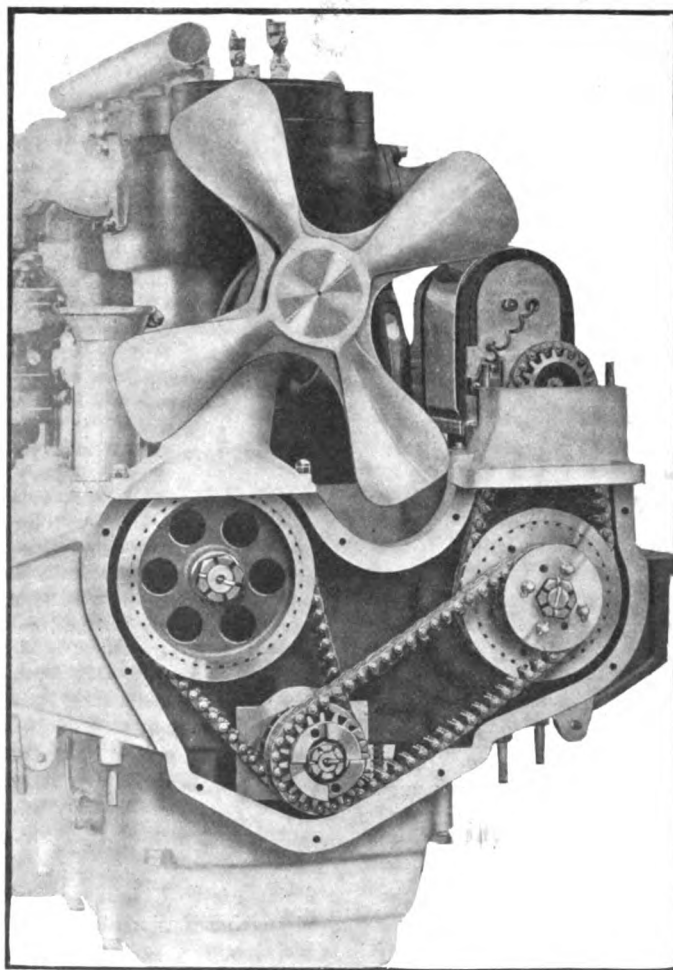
Front view of Stearns-Knight motor with front plate of timing gear case removed, showing silent chain drive
